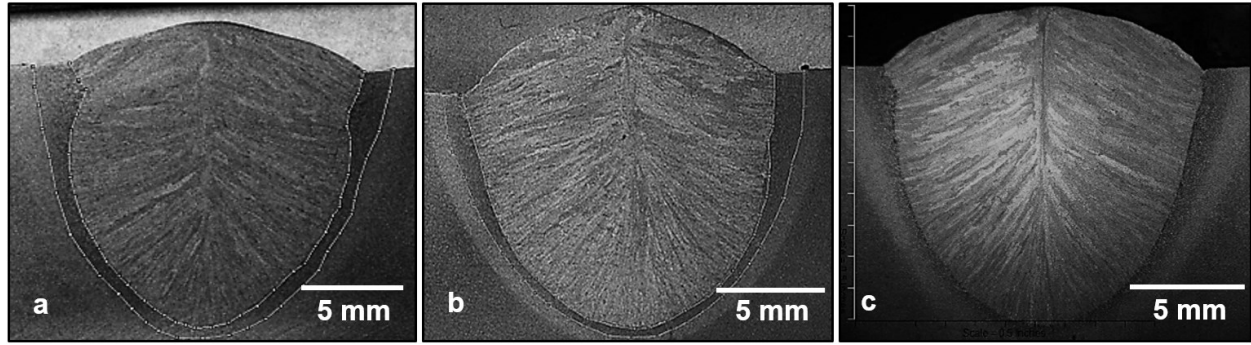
Macrographs of welded samples: (a) TS, (b) CW1 and (c) CW3.
